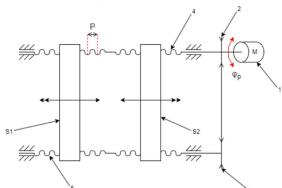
Schematic representation of the handle distance adjustment subassembly.
